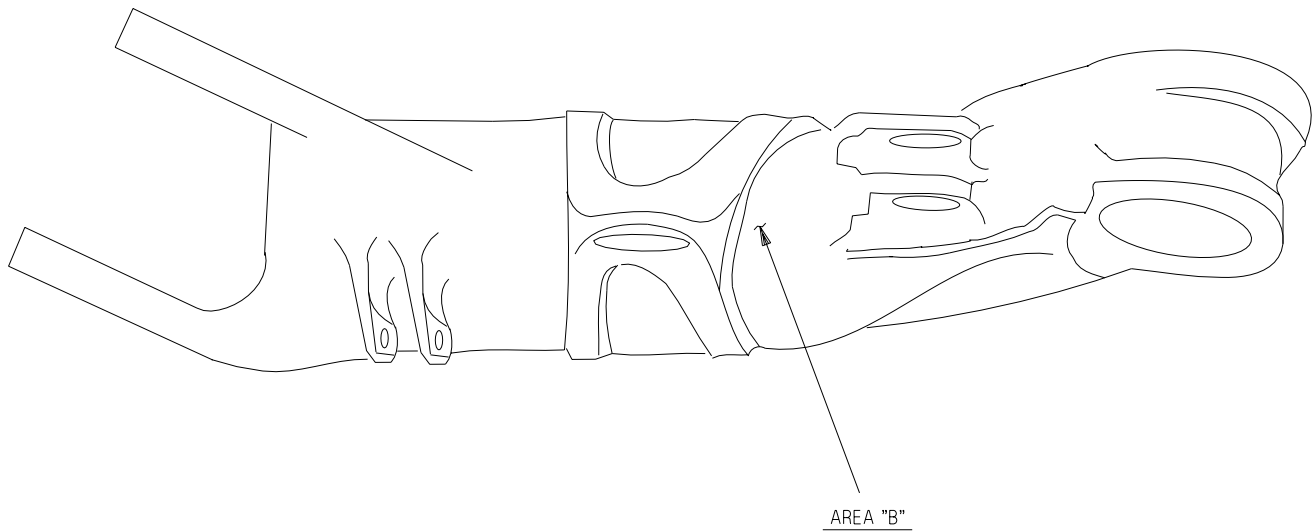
R/H Main Landing Gear Lever P/N 74A410506 Inspection Locations (Sheet 1)
